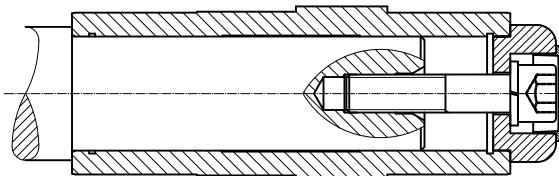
Gear unit mounted to shaft with a shoulder using the fastening element
